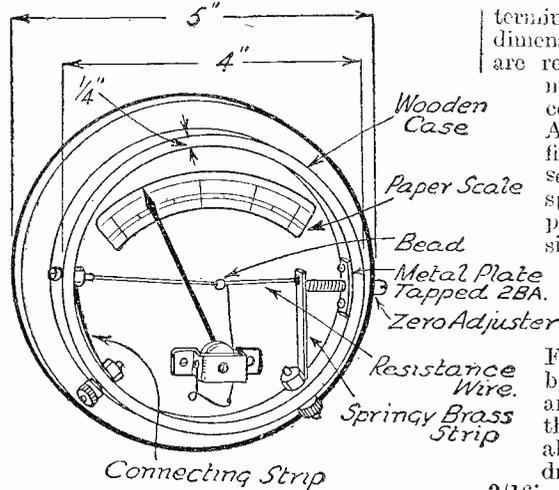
Sketch of the finished hot-wire meter described: dimensions are only approximate.
